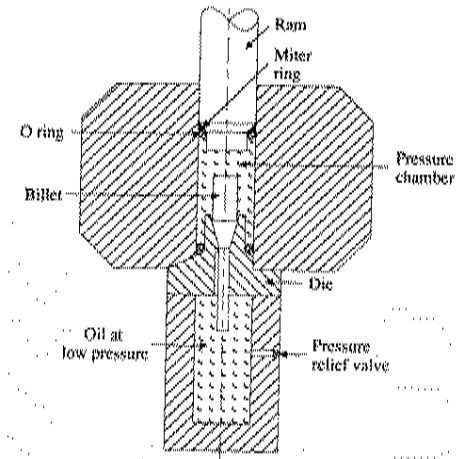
Schematic drawing of a ram-type extrusion chamber for the pressure-to-pressure hydrostatic extrusion process [7.3].
